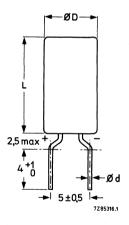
Style 1; see Table 1 for dimensions d, D, L and P.
